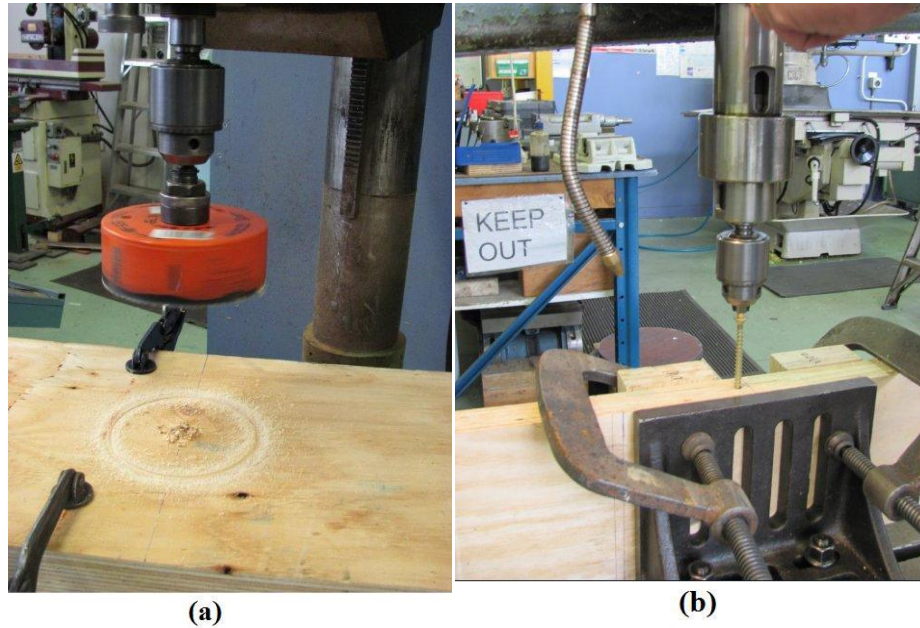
(a) Cutting hole in a beam, (b) drilling screw in LVL
